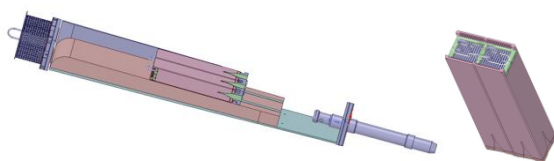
Left: The converter inner structure design. Right: Isometric view of baskets with plates.
